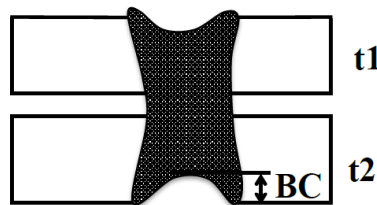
Bottom Surface Concavity (Remote Laser Welding)
